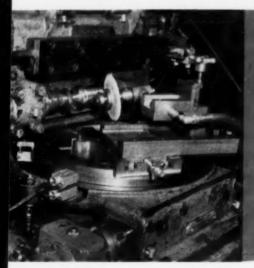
Close-up view of cone worm polishing machine, showing the revolving type table on which polishing unit is mounted.
